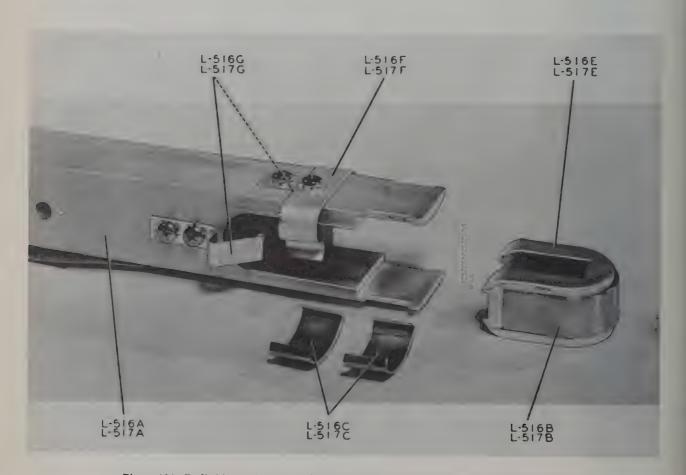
Radio Transmitter T-454/FRT-26, IPA Plate Tank Sliding Contact Assembly.
